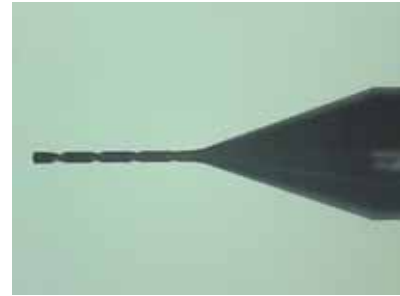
Micro Hole Drill (\varnothing 0.10, Carbide)
